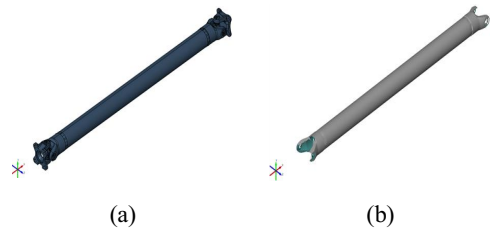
(a) CAD data and (b) 3D Scanning data of CFRP Propeller shaft
